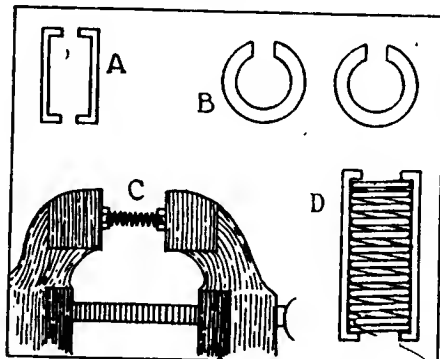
Practical Suggestion for Compressing Valve Springs.
